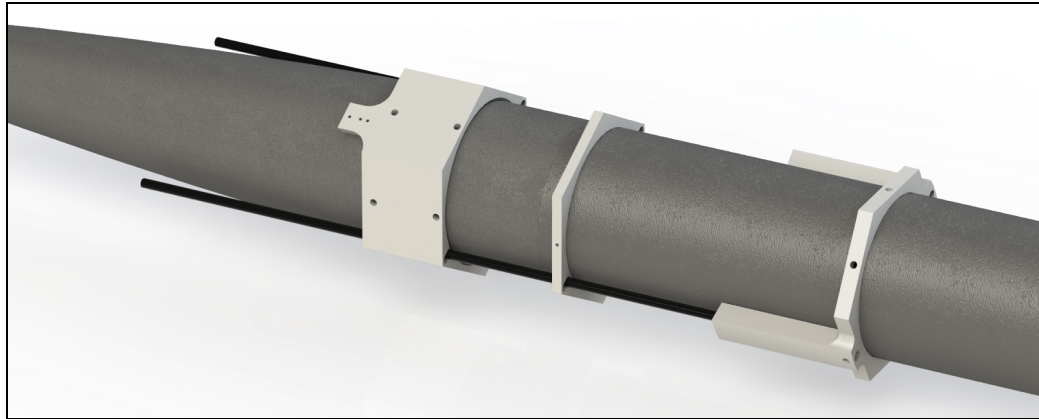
Hole Drilling Jig for Nose Cone and Upper Airframe
